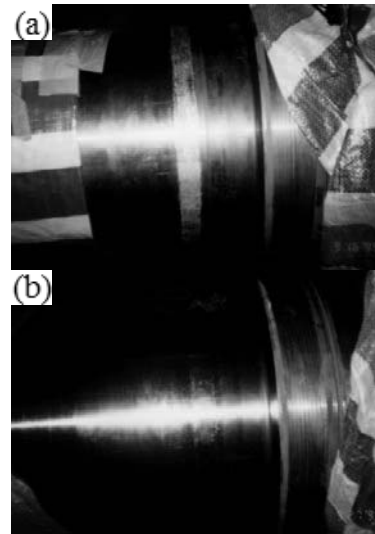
Seal section shaft after repairing and finishing, (a) repairing; (b) finishing.
